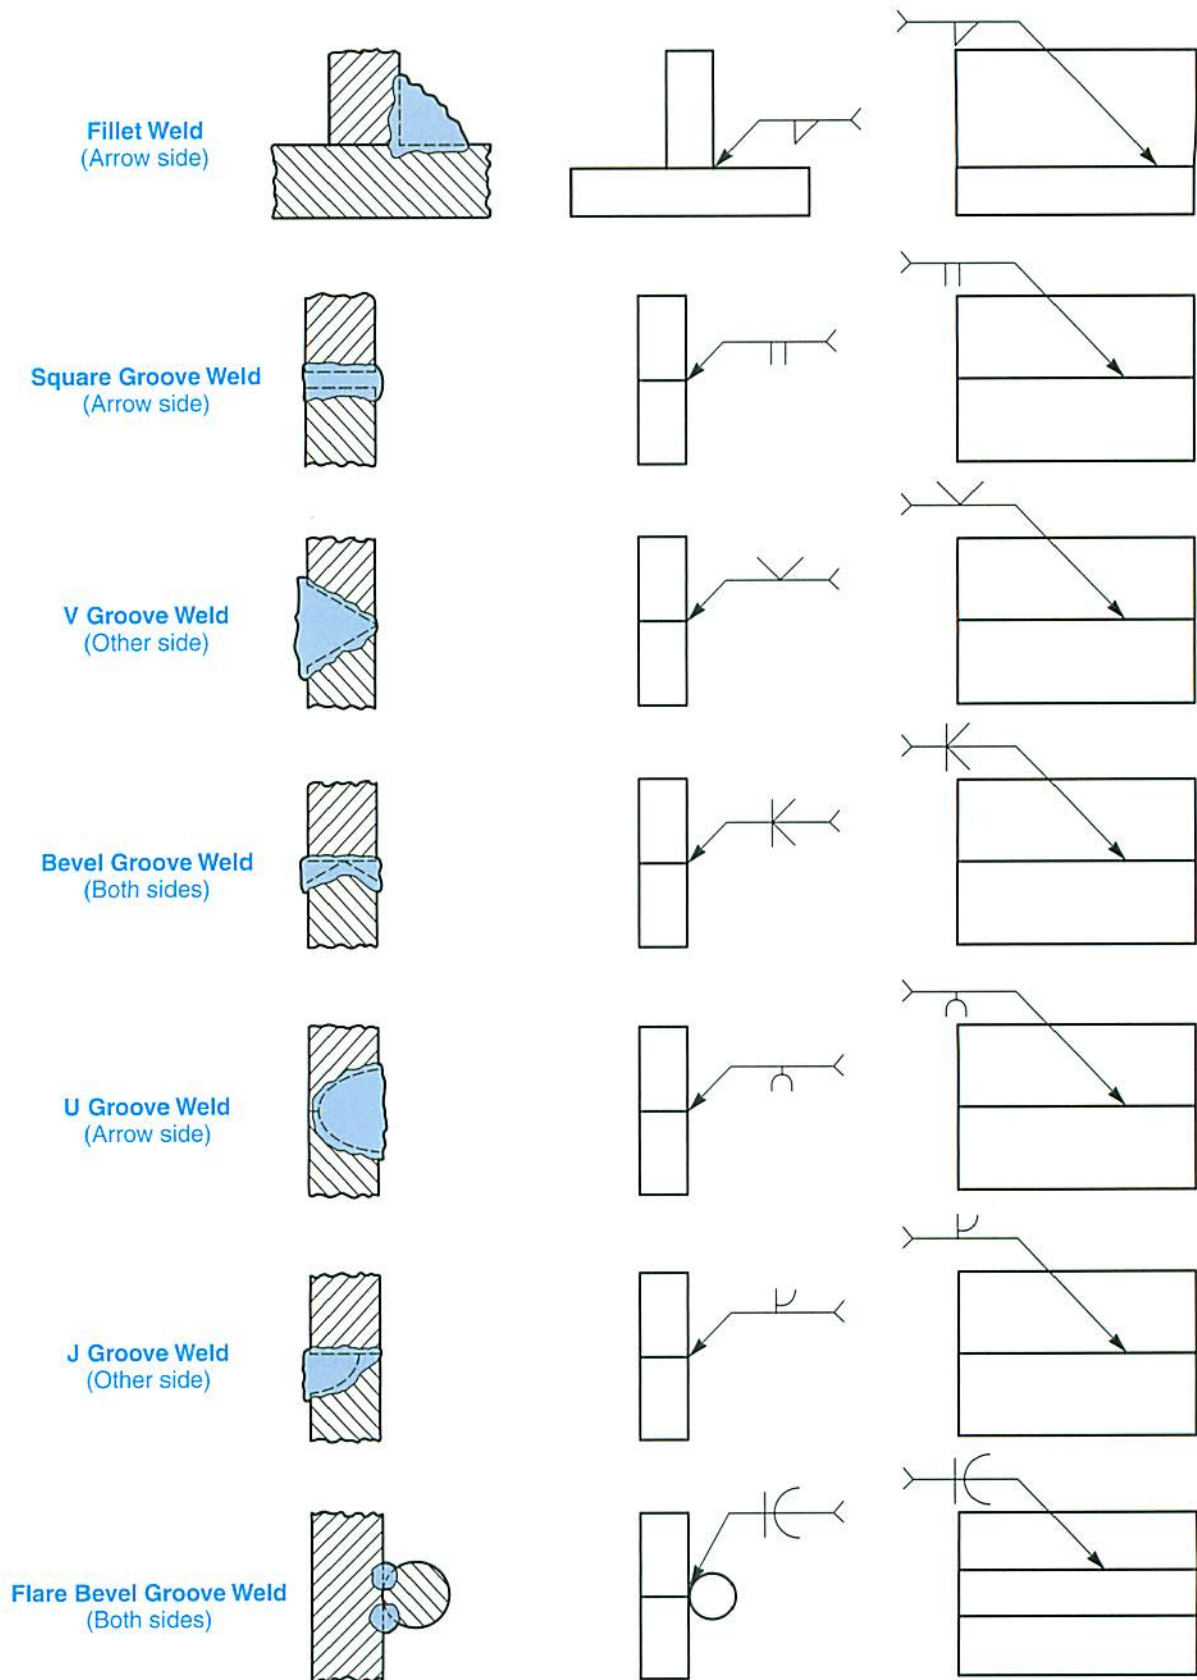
Common types of welds. Each type is represented differently on a drawing.
